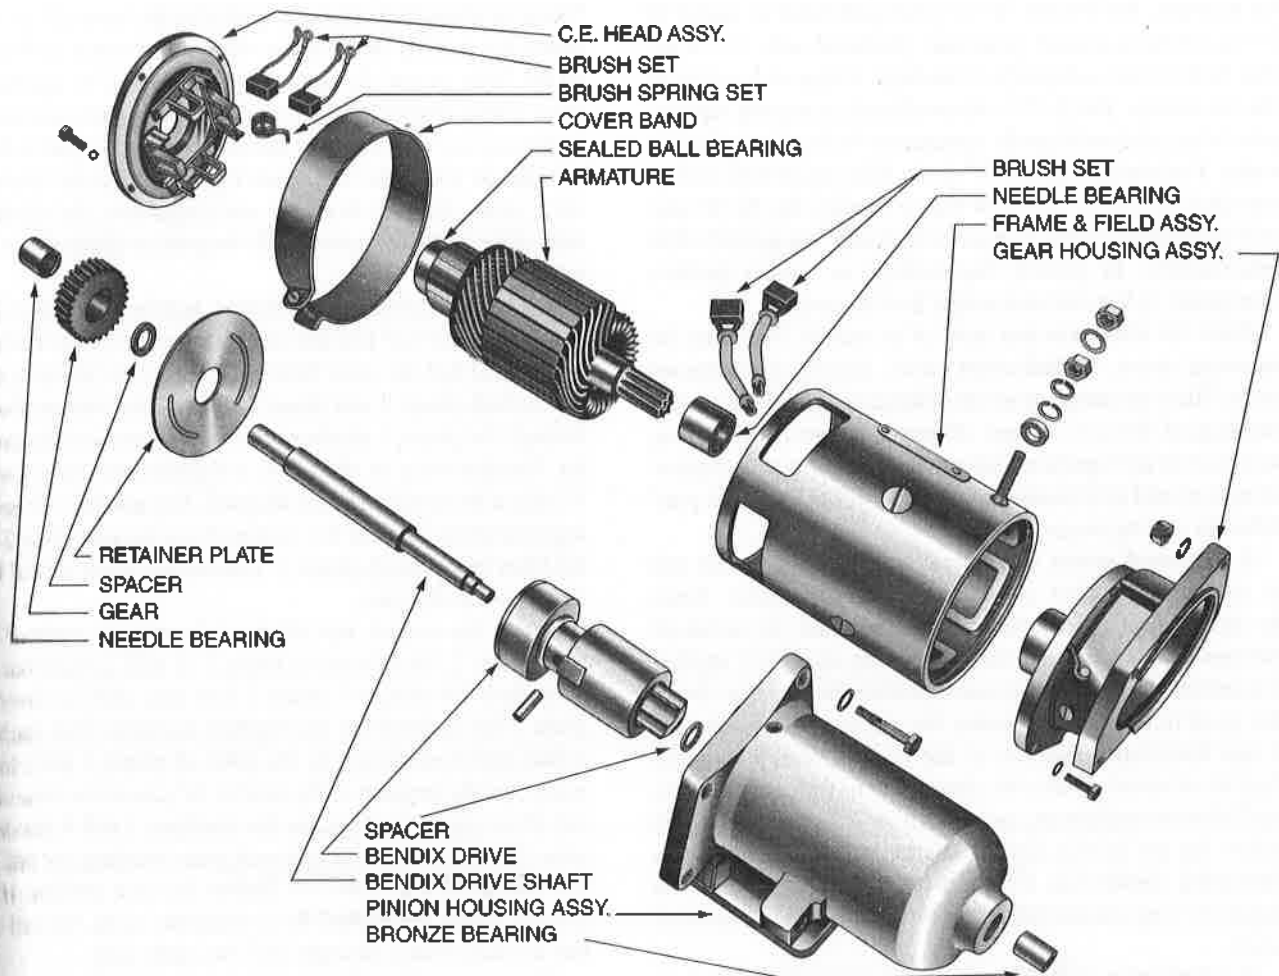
Exploded view of starter motor and drive. (Prestolite.)
